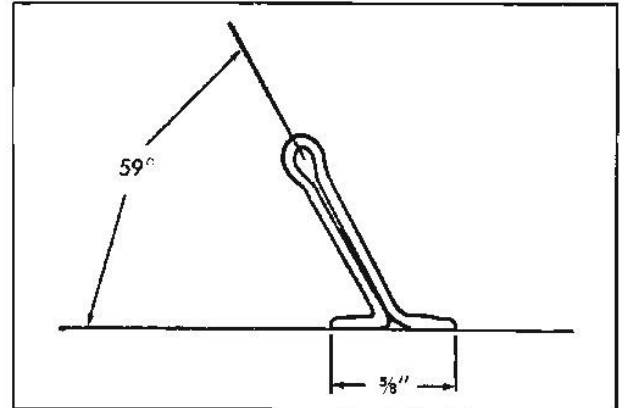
Tool for Removing Upper Half of Main Bearing
